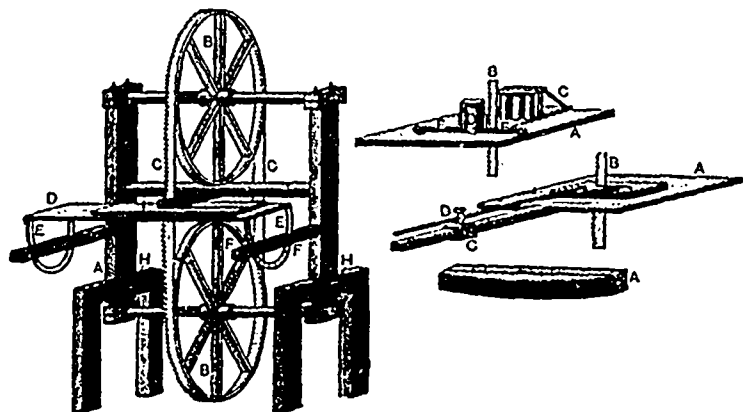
THE FIRST BAND-SAW MACHINE.
